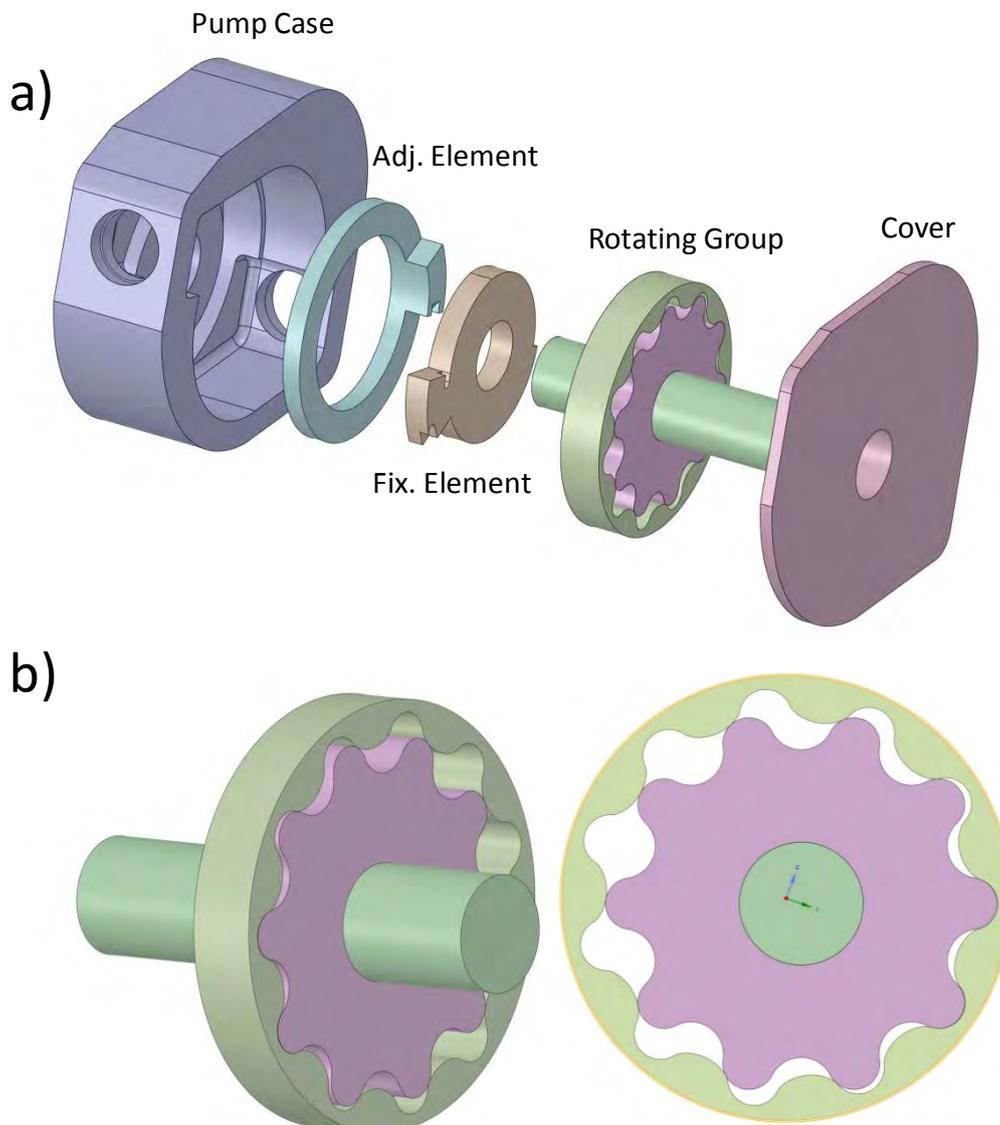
Main gerotor pump, first geometry: (a) overall view; (b) rotors.
